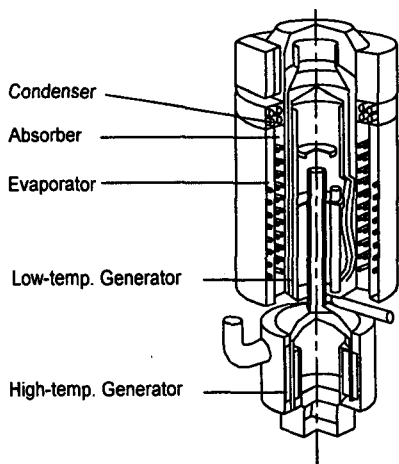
Schematic drawing of the absorption chiller/heater structure.
